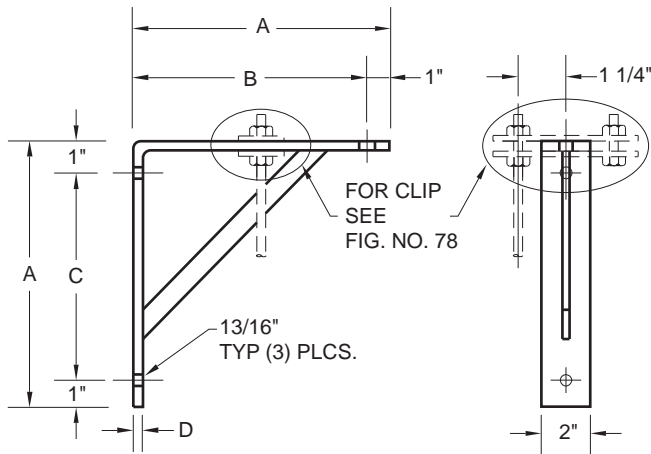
LIGHT WELDED STEEL BRACKET
